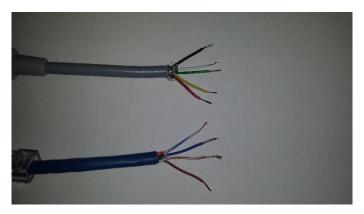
Both cables stripped and ready for soldering. Slide heat shrink onto cables before soldering.
